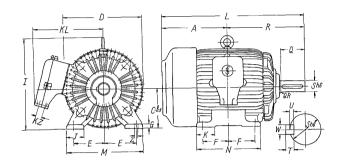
Outline dimensions (Frame No. 81 L \sim 1012)
